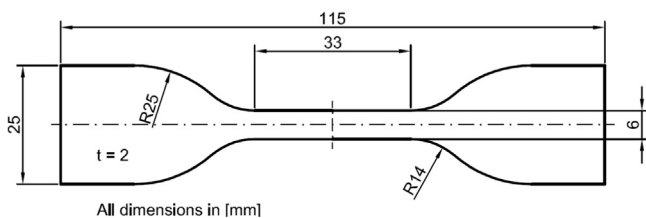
Dimensions of the tensile test specimen according to ASTM D412 [26].
